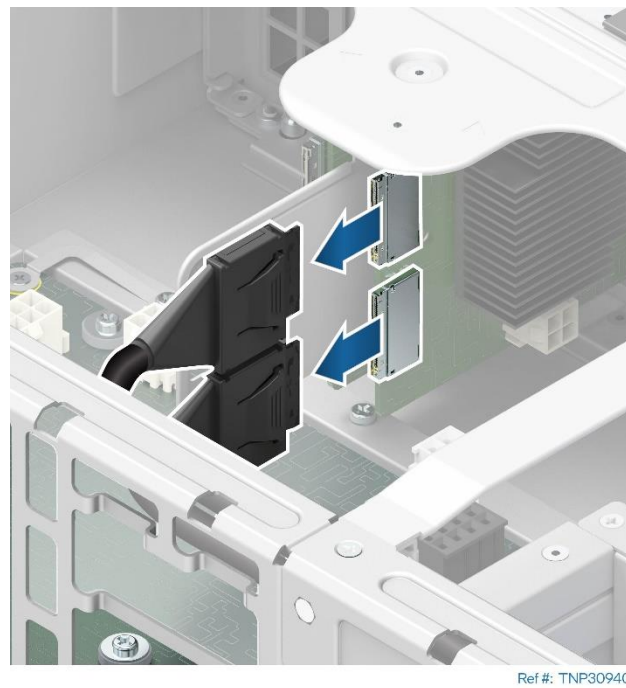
Disconnecting the Riser Card Power OCUlink Cables
